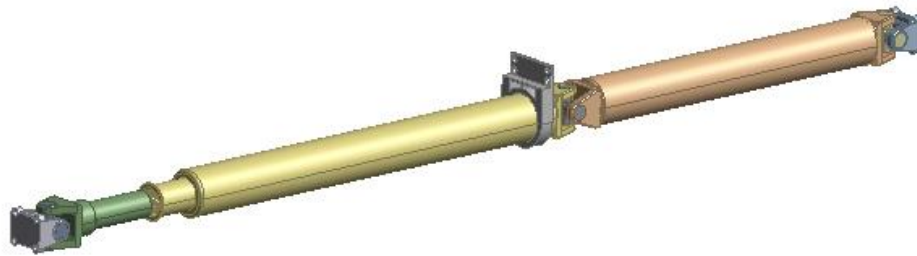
The Geometry of the two-piece modified shaft after imported to ANSYS
